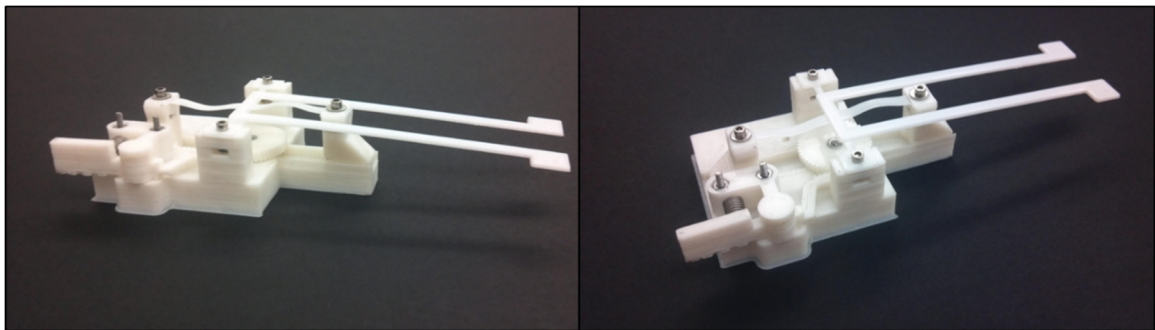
3D printed adjustable bi-stable buckled prototype with locking gear.
